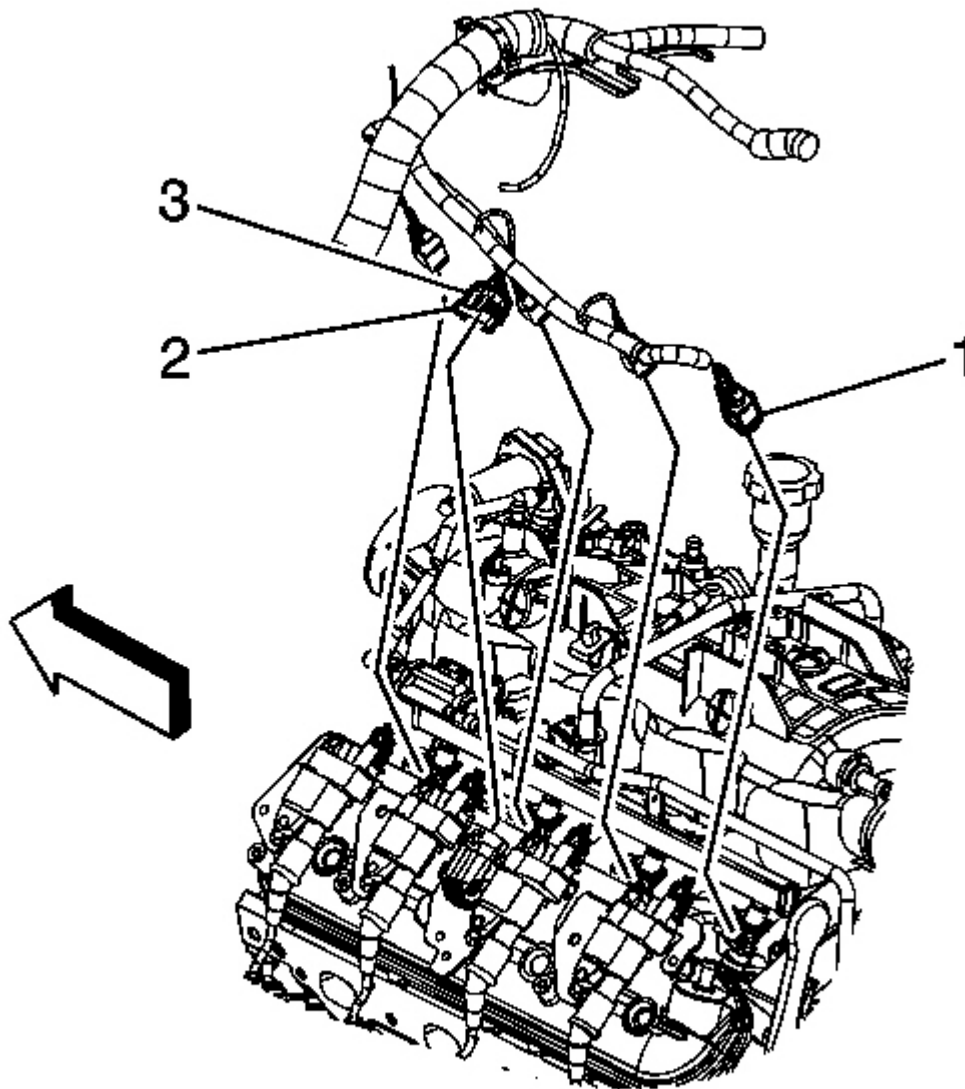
View Of Engine Wiring Harness Main Ignition Coil Electrical Connector
